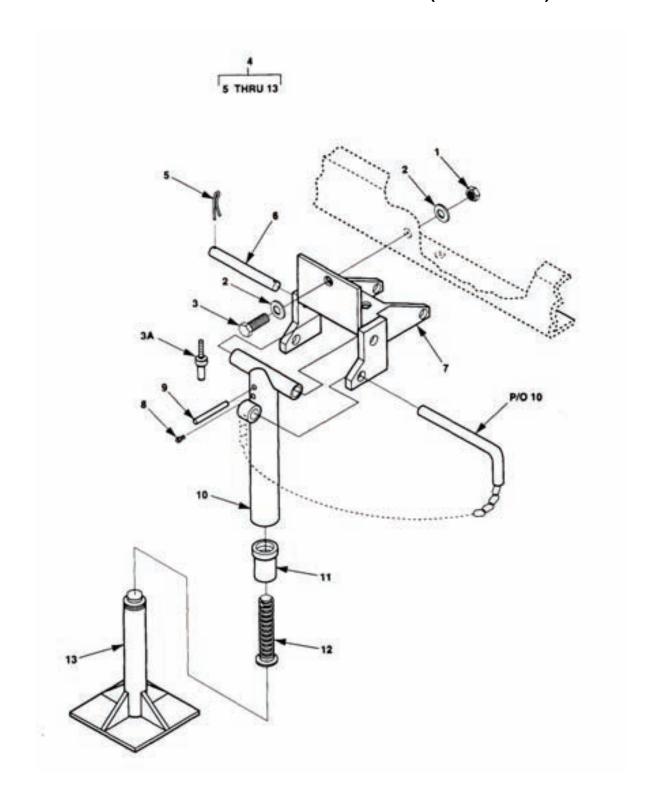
One Ton and LTT Trailers Leg Prop Assembly.
